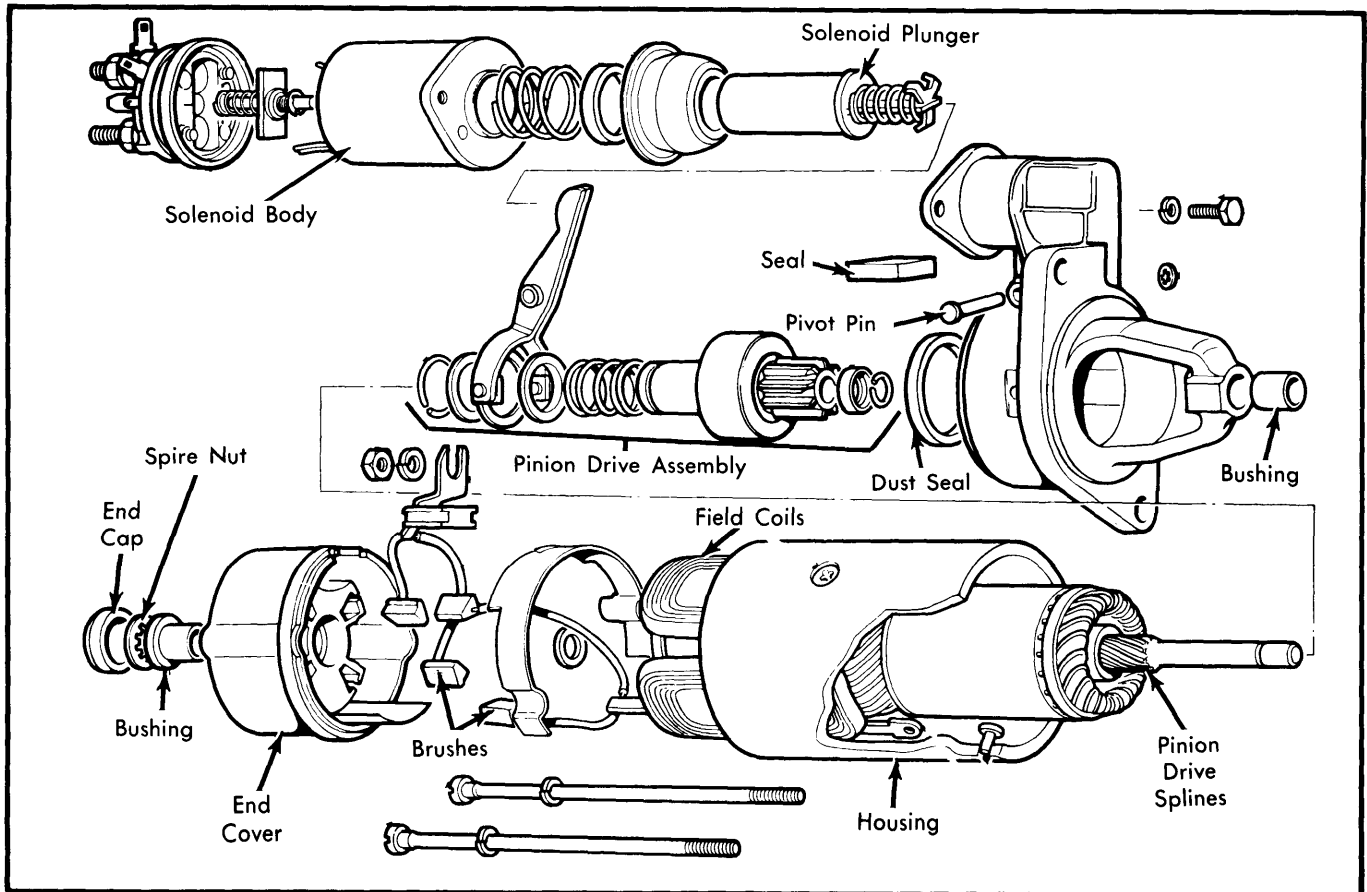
Exploded View of Lucas Pre-Engaged Starter
